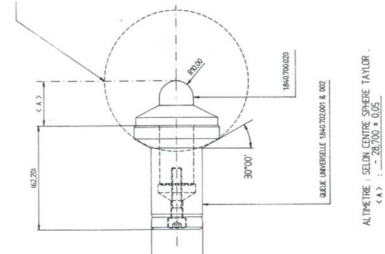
Accurate centering system of reference points placed on the Tunnel floor.
